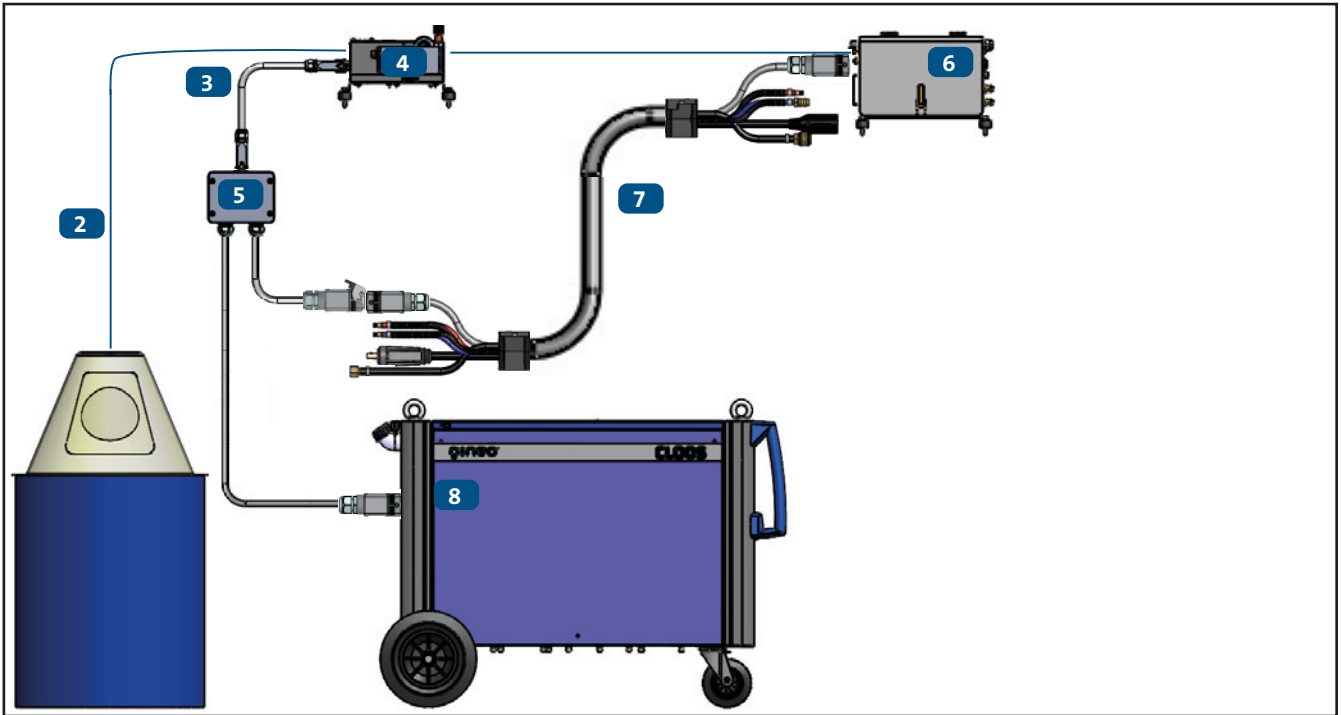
Arrangement Qineo Pro with splitter B (831702100) on welding power source
